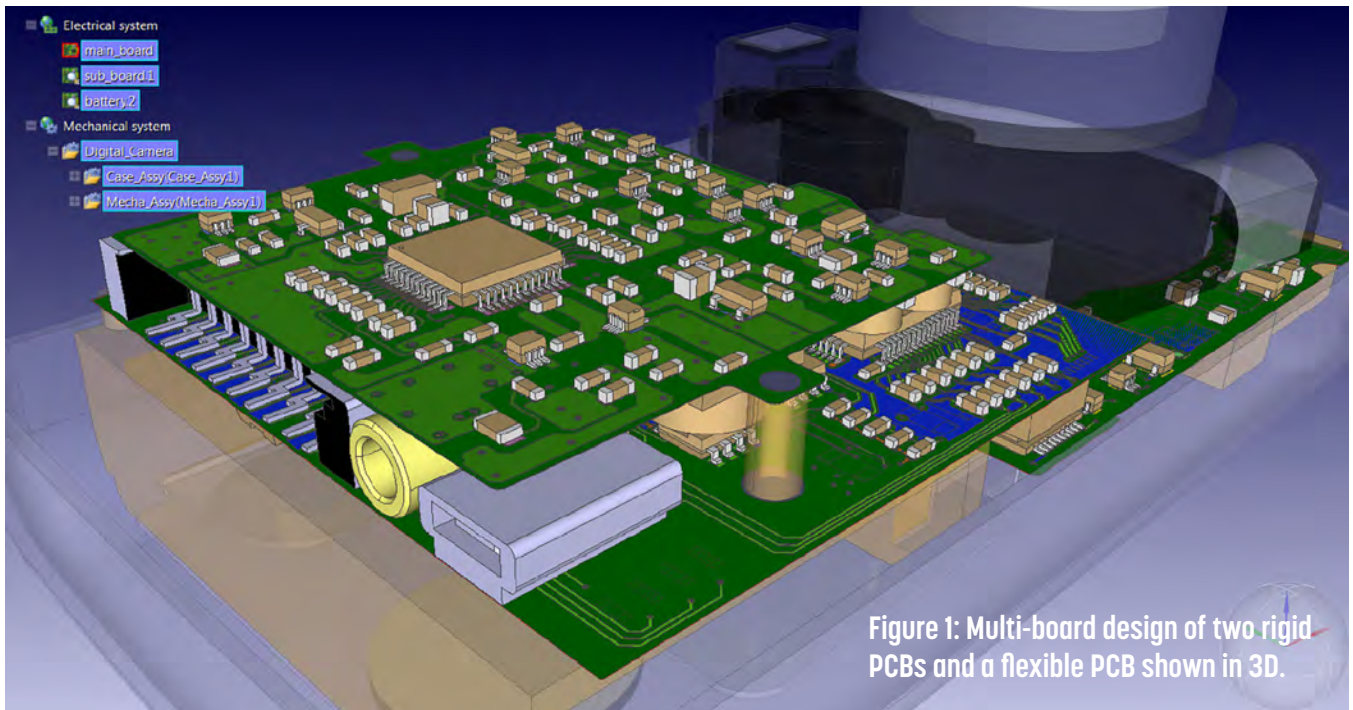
Multi-board design of two rigid PCBs and a flexible PCB shown in 3D.
